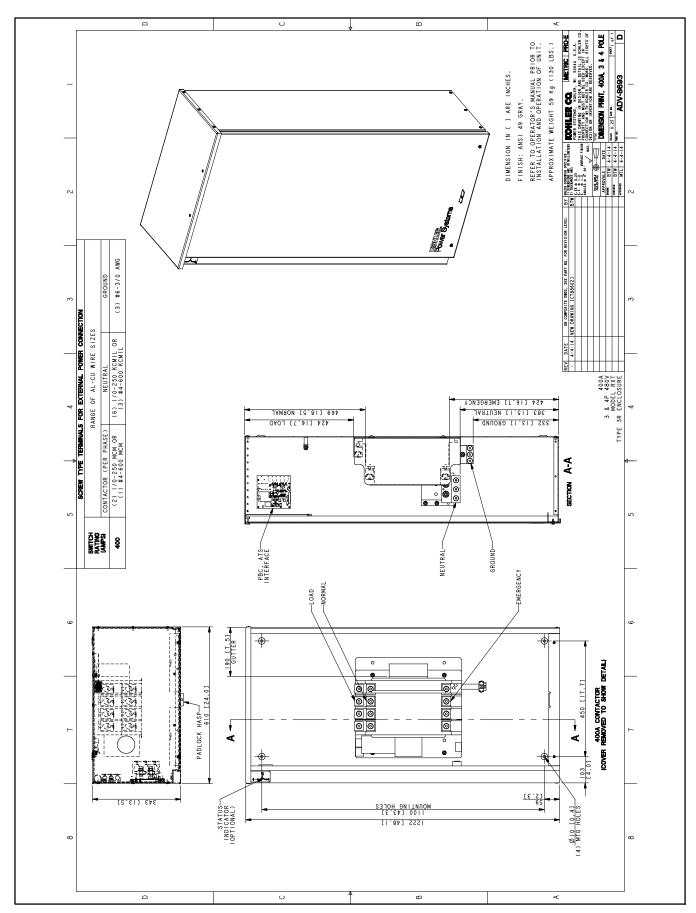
Enclosure Dimensions, 400 Amp Three-Phase, 3-Pole/480 Volt and 4-Pole, ADV-8693
